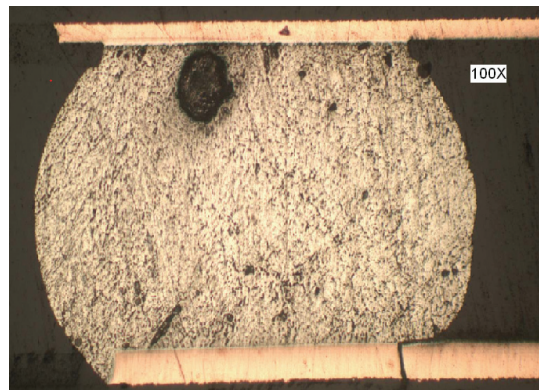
Example of BGA Failure from Mechanical Shock Test 2
